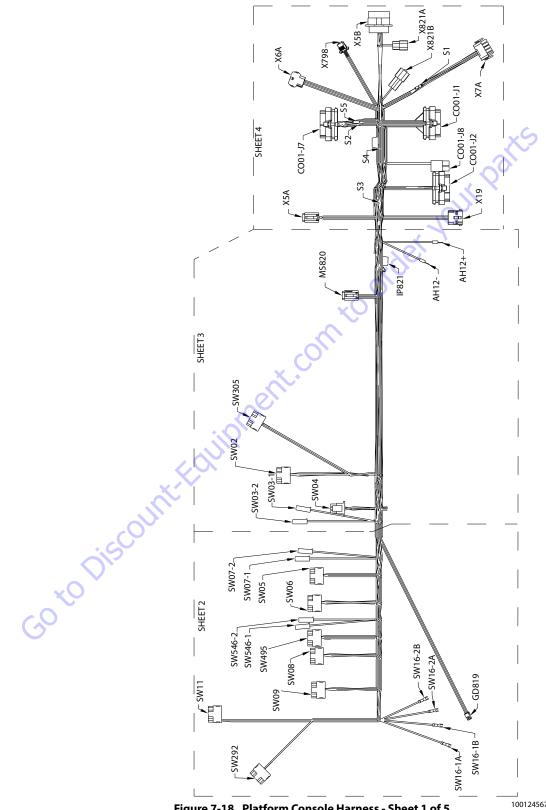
Platform Console Harness - Sheet 1 of 5
